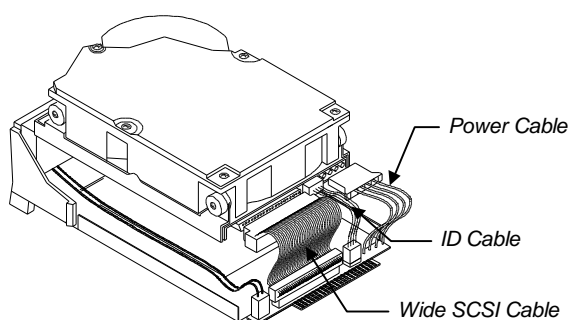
Connecting the Drive Cables (wide SCSI drive)
